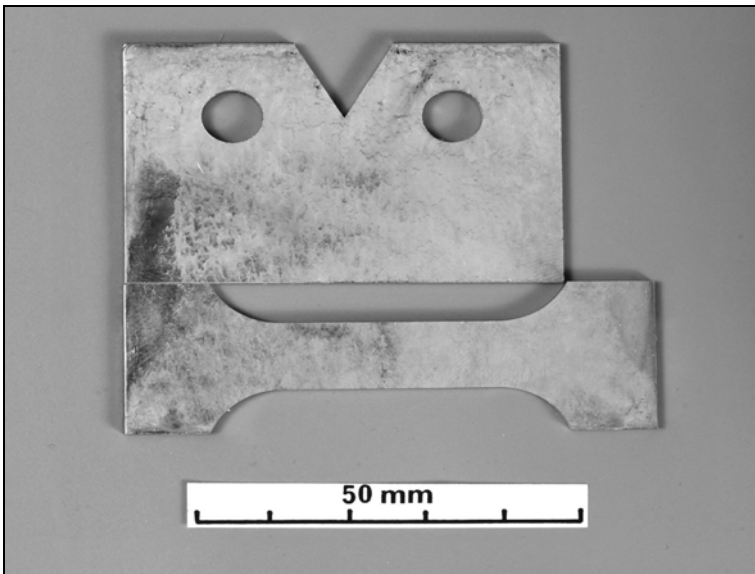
Tear test and tensile sample machined from plates with dimensions 60x70x2 mm.
